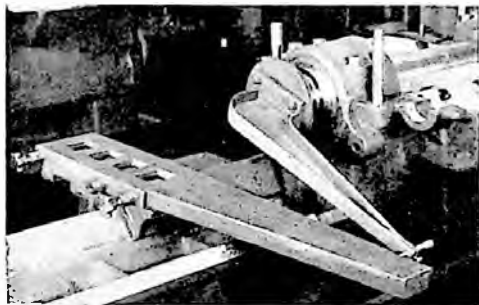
Fixture for Aligning Cross Slide Carriage with Spindle
